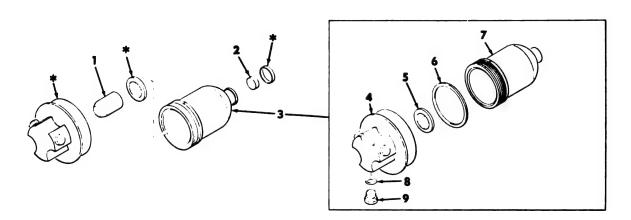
CASE AND ADAPTER ASSEMBLY /10228126/ /SEE FIGURE 17 FOR NEXT HIGHER ASSEMBLY/
